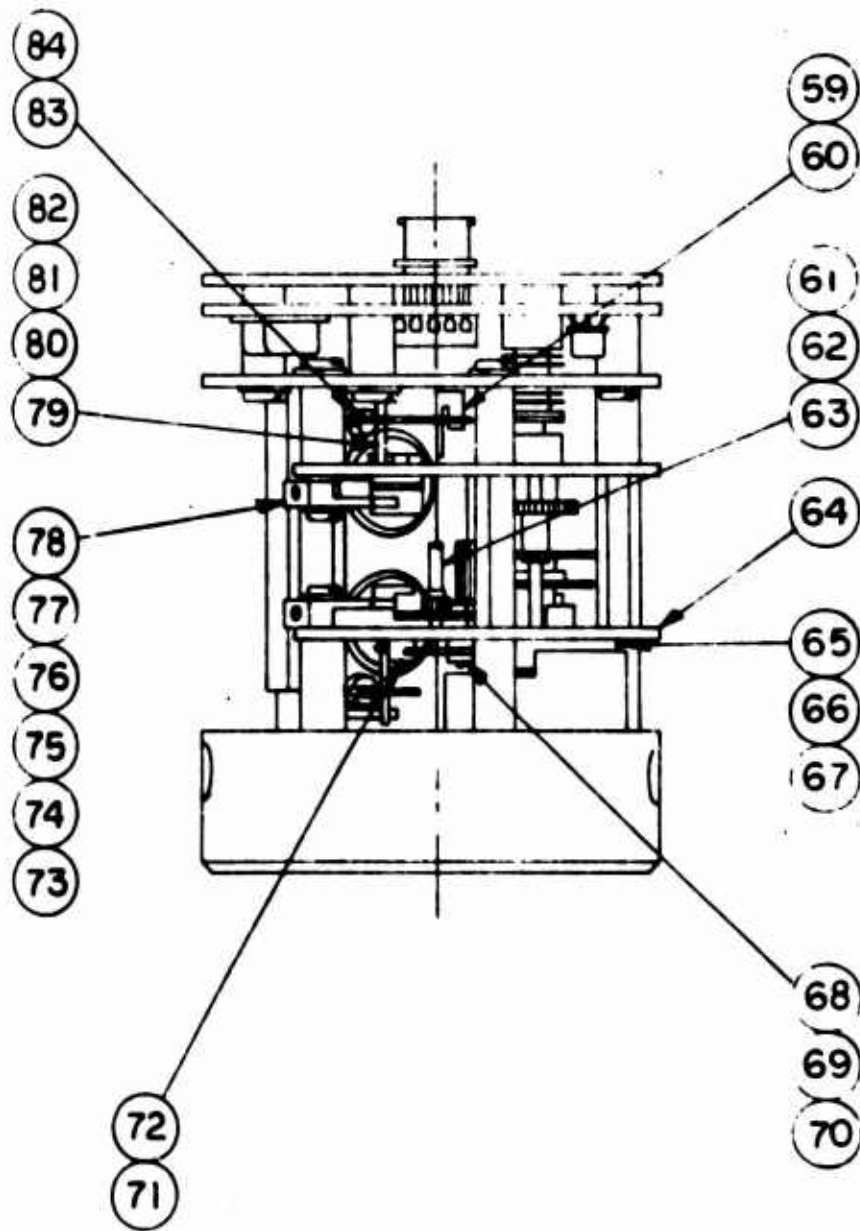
IMT Detailed Assembly Drawing (Concluded)
